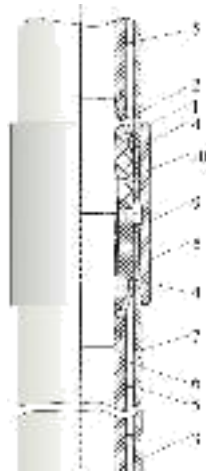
VIT; 1 – the outer tube; 2 – the inner tube; 3 – the annular space between outer and inner tubes; 4 – the vacuum tight joint; 5 – the centralizer; 6 – the multi-layered insulation; 7 – the valve hole; 8 – the thread; 9 – the clutch; 10 – the insulating insert [5]
